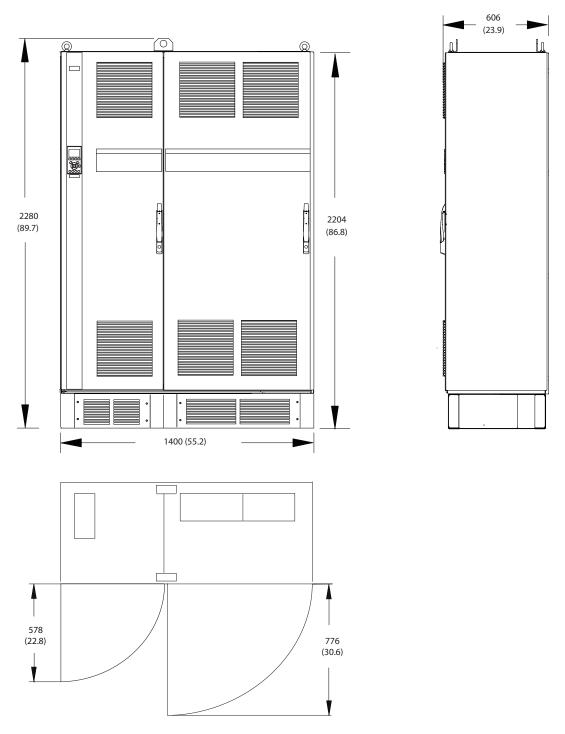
Front, Side, and Door Clearance Dimensions for F1
